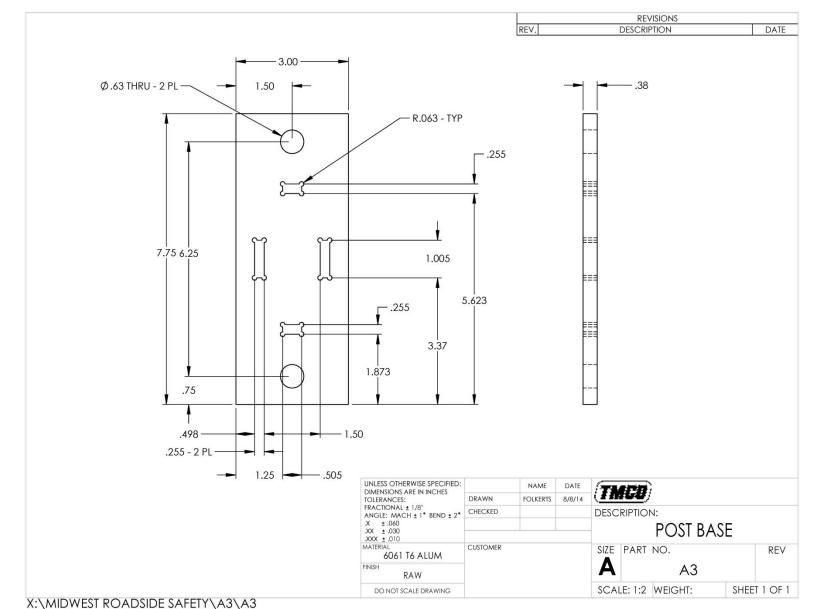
Fabrication Drawings, Test Nos. APR-1 and APR-2
